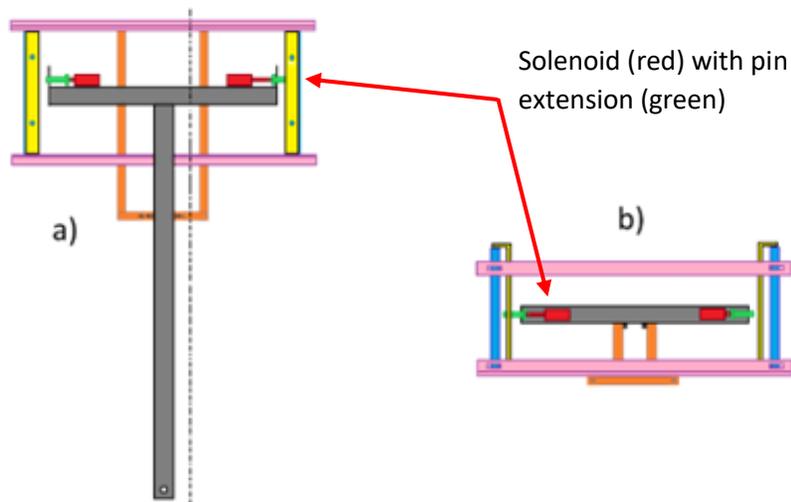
Prototype testing rig setup, (a) Top view, (b) Rear view
